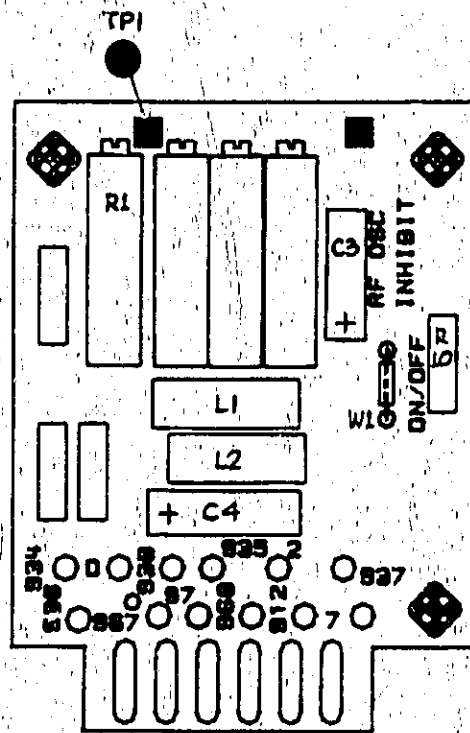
P/O A3A4 Connector Board Assembly Component Locations (P/O CHANGE 36)
